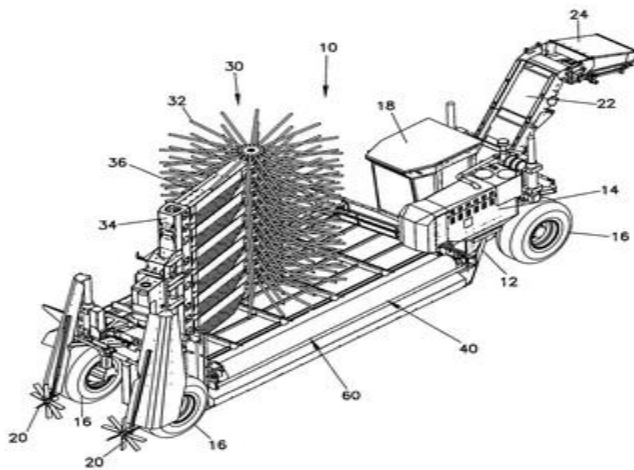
Sketch of a citrus harvester machine with fruit conveyer. [Adapted from Schloesser, 2005]
